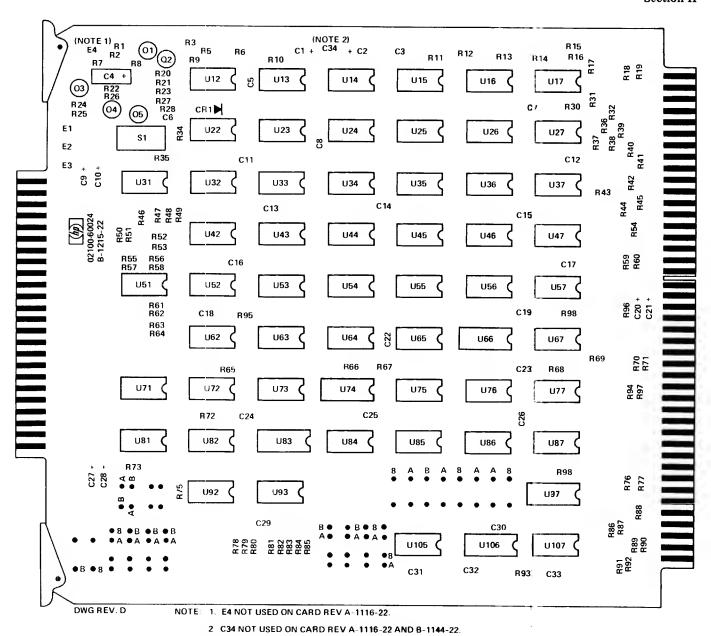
A7 I/O Control Card, Parts Location Diagram
